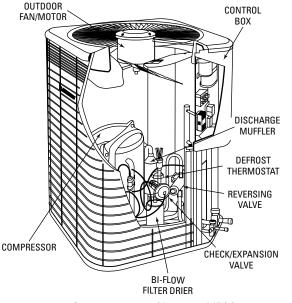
Cutaway view of Lennox HP29 reciprocating compressor. (Courtesy Lennox Industries Inc.)
